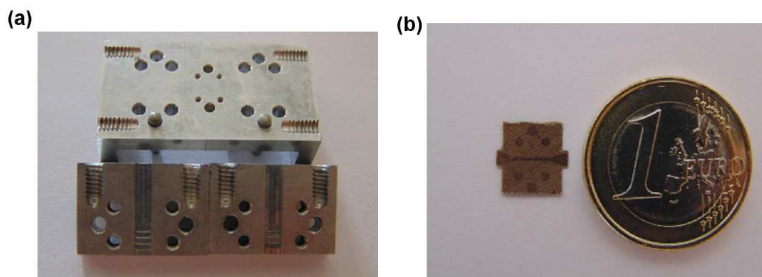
Photograph of (a) a fabricated back-to-back waveguide block; (b) a fabricated microstrip taper in Rogers CuClad.
